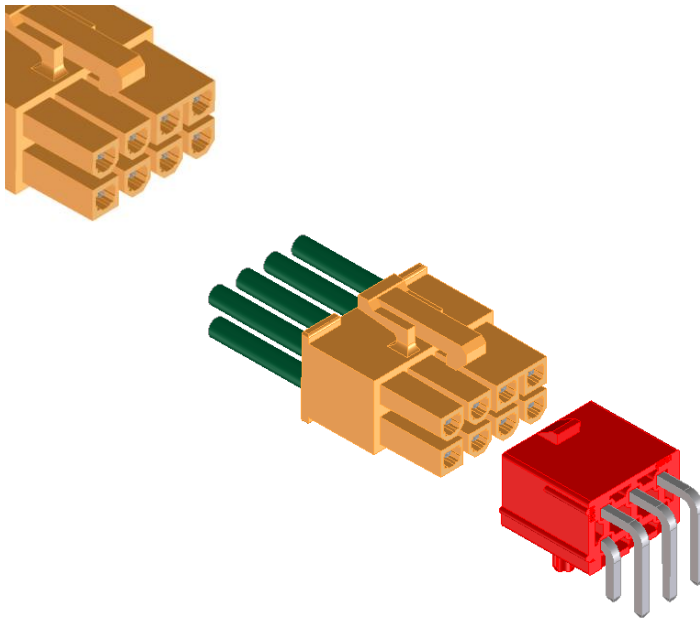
2x4 Cable Plug is Physically Prevented from Mating with a 2x3 PCB Header
